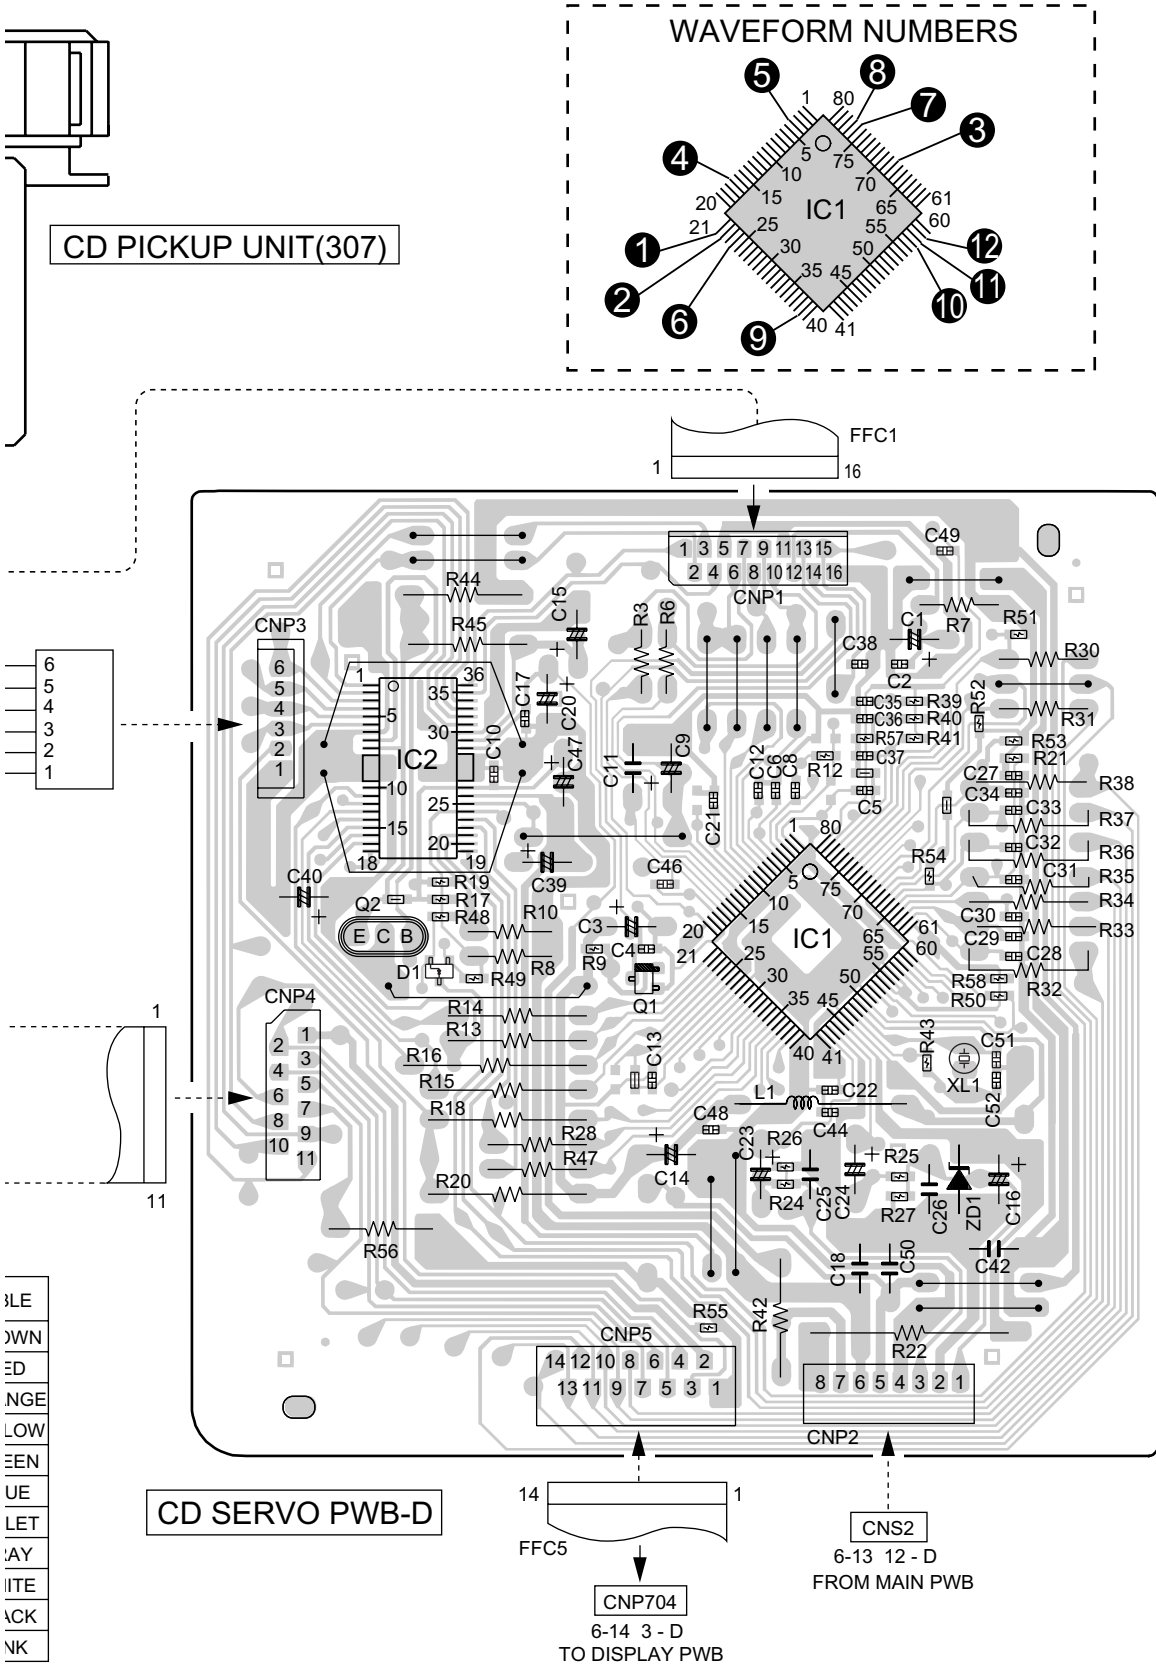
WIRING SIDE OF P.W.BOARD (6/9)
